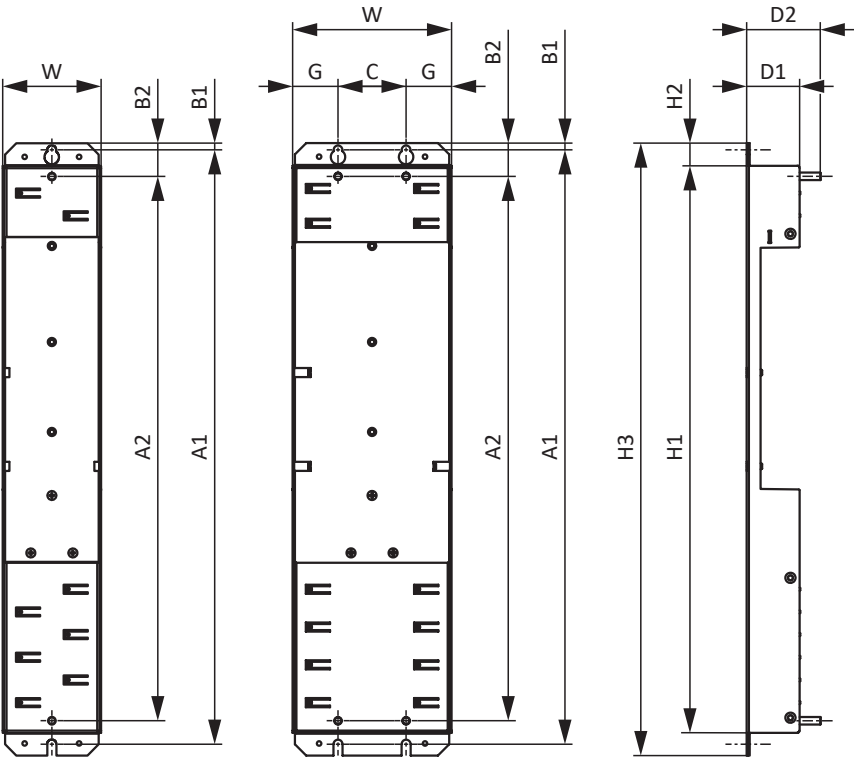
Dimensional drawing of DL6B10 to DL6B21
